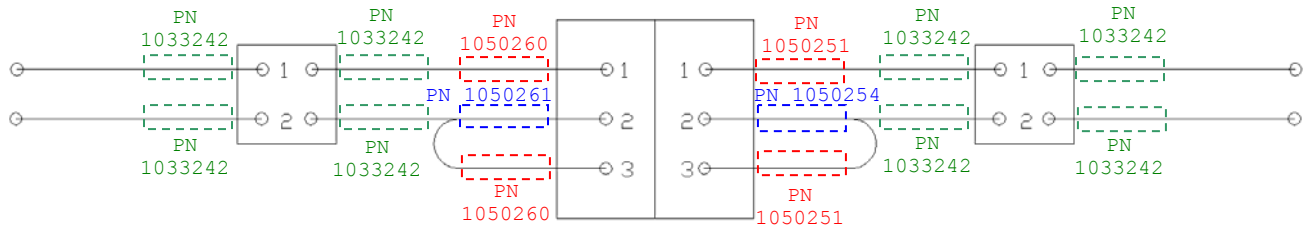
OVERALL SOLDERING REQUIRED FOR TESTING
